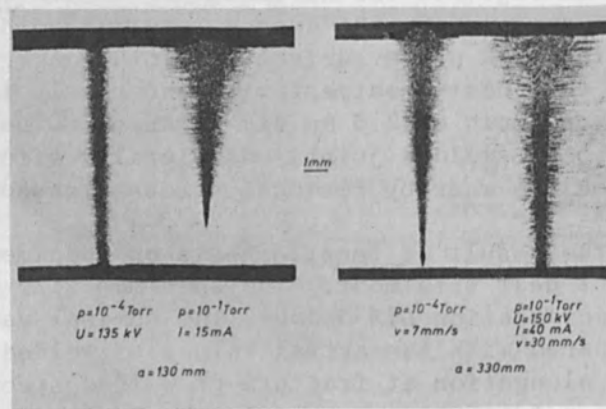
Deep-penetration welding of C 22 steel.
